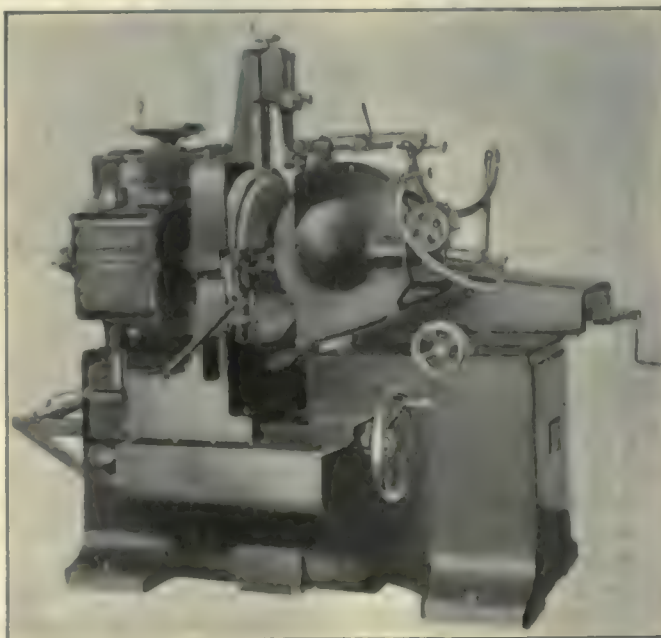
REEVES CENTERLESS GRINDING MACHINE
